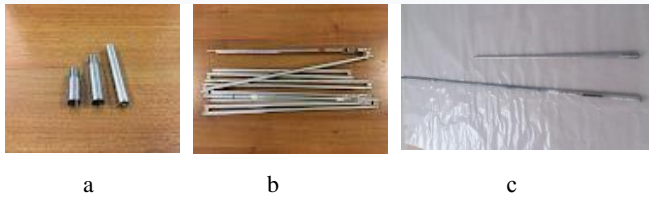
Photo view of the collet (a), rod (b) and developed a new non-standard tools (c) for the removing 2 emergency Co-60 sources.
